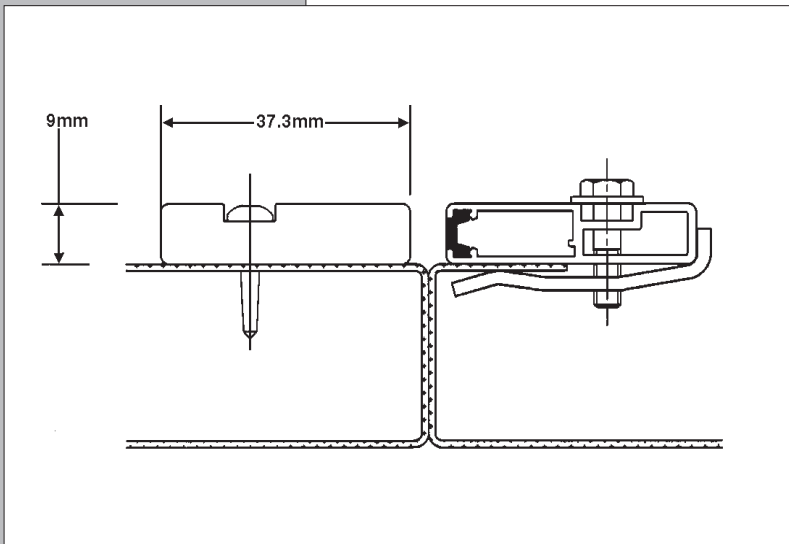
Model 743 000 - Ultraslim Detectors showing optional fixing clamp plate (5 included in kit Part No 743 803)
